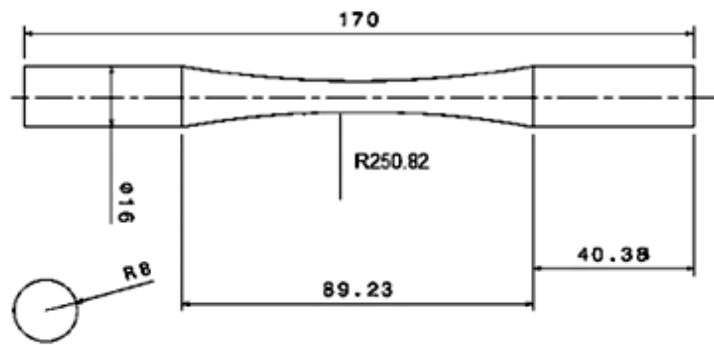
Geometry and Dimension (mm) of Fatigue Specimen
